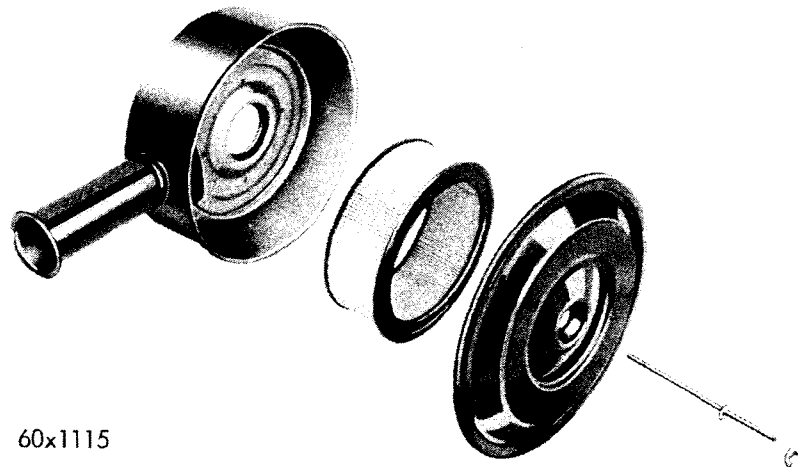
Dry Type Carburetor Air Cleaner (Typical)
